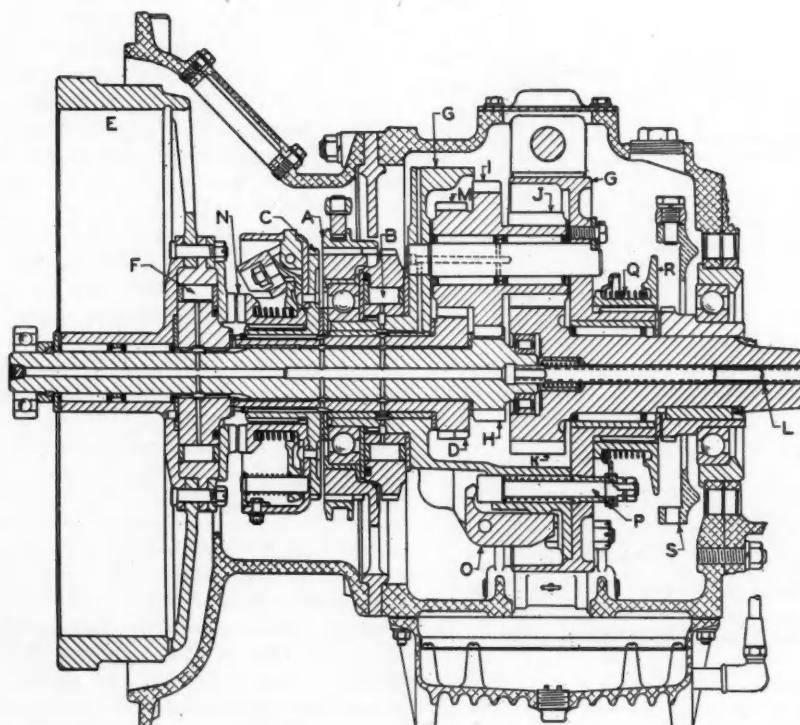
Longitudinal section of Yellow Coach automatic shifting transmission. (Monodrive patents)
